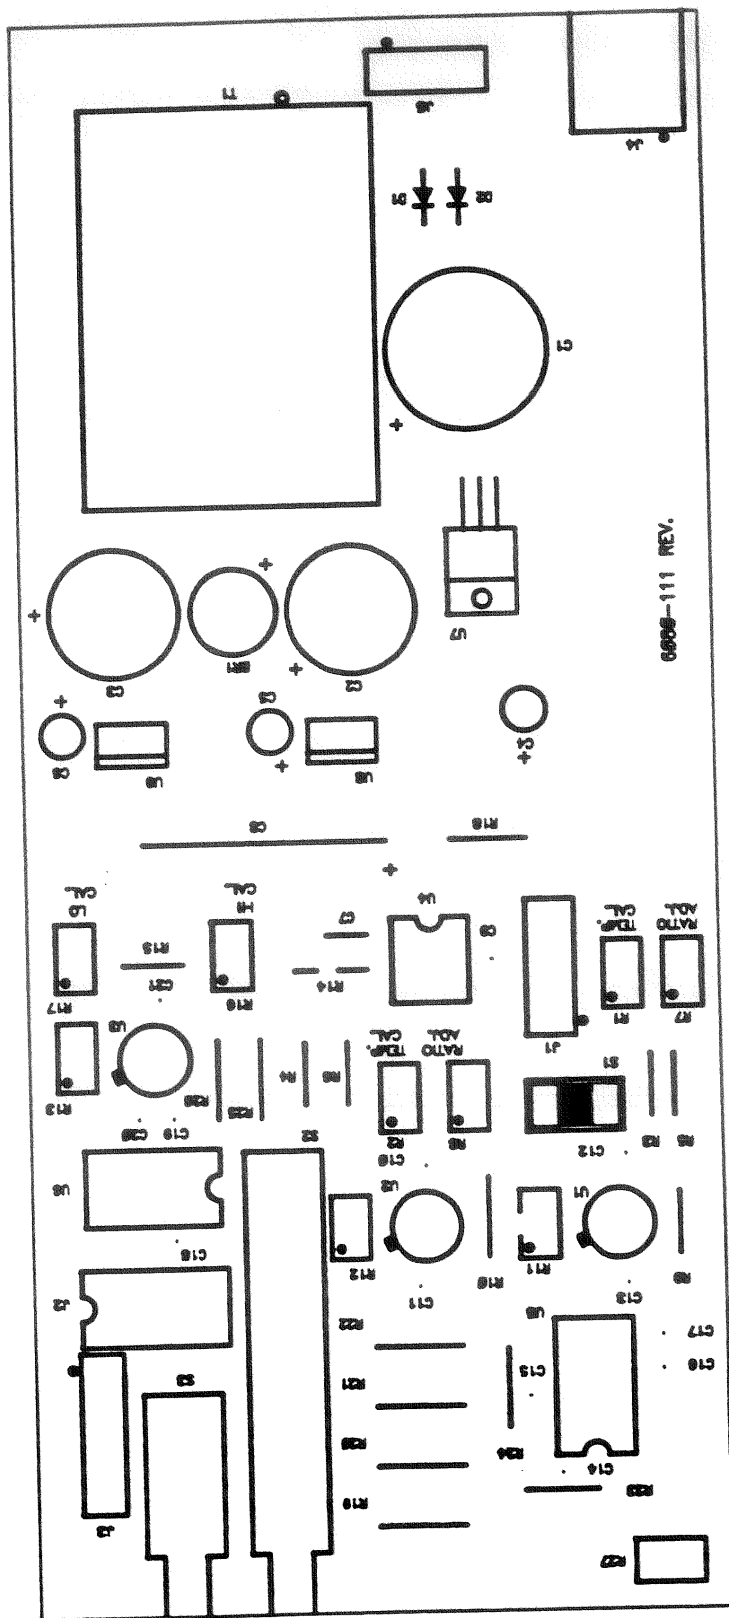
FLOW INDICATOR PC BOARD COMPONENT LAYOUT.
